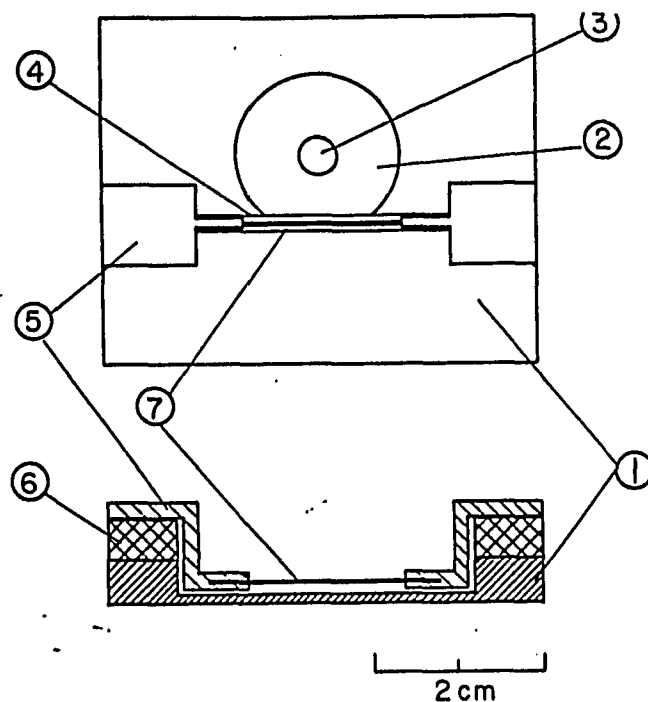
Scale drawing of anode extractor with embedded cesium dispenser showing (1) stainless-steel plate, (2) molybdenum anode, (3) anode aperture, (4) cesiator mounting slot, (5) Macor supports, (6) OFHC cooper, (7) and SAES Getters cesiator
